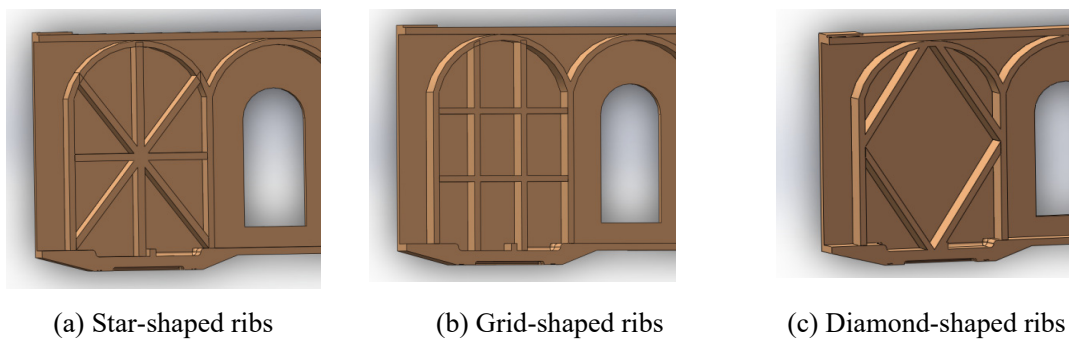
Cross-sectional views of crossbeams with different rib configurations
